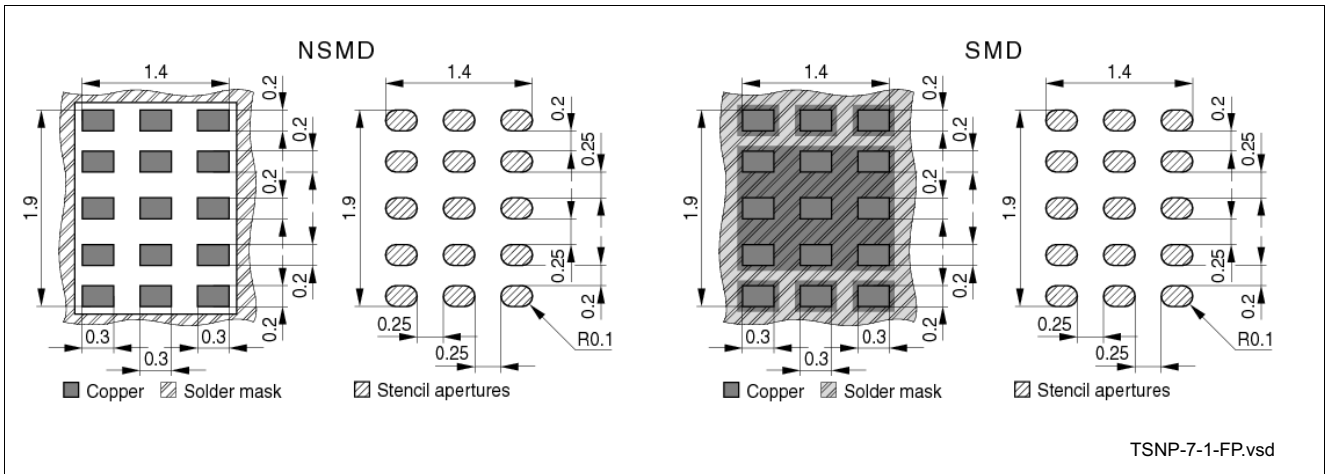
Recommended Footprint and Stencil Layout for the TSNP-7-1 Package
